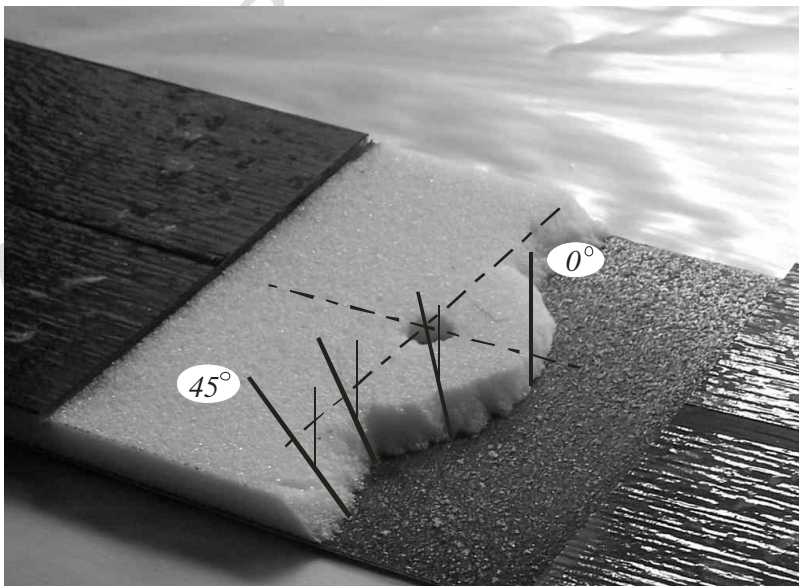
Specimen c-a-060 with debonded back face sheet removed for clarity.
